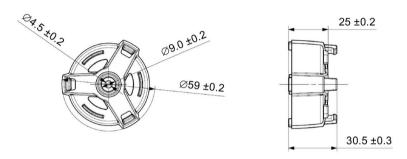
Dimension drawing of spacer 6GT2690-0AL00
